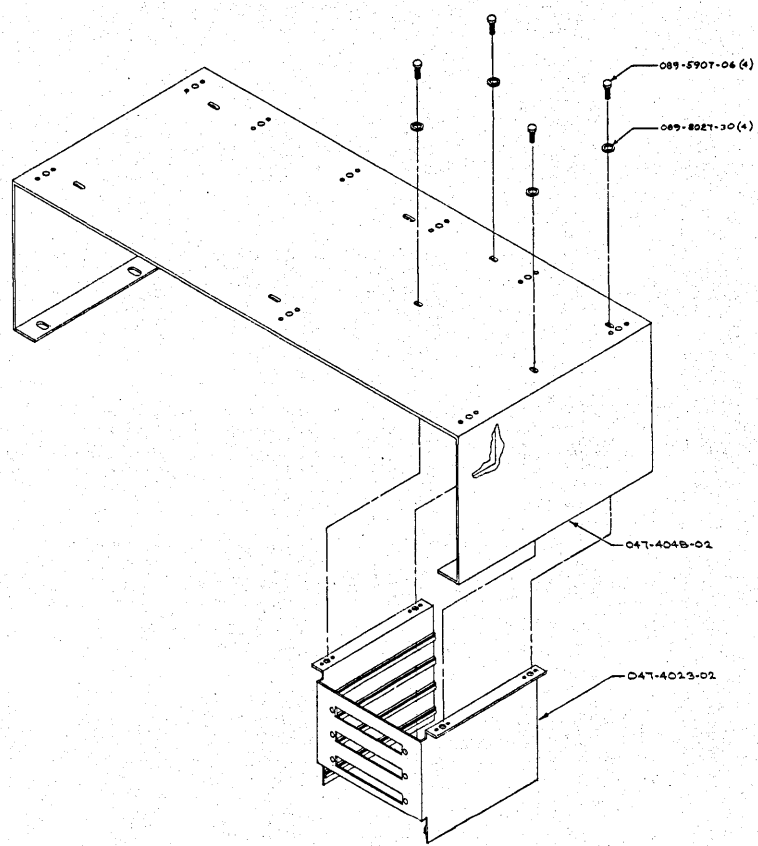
CHASSIS ASSEMBLY (SHT 1)
